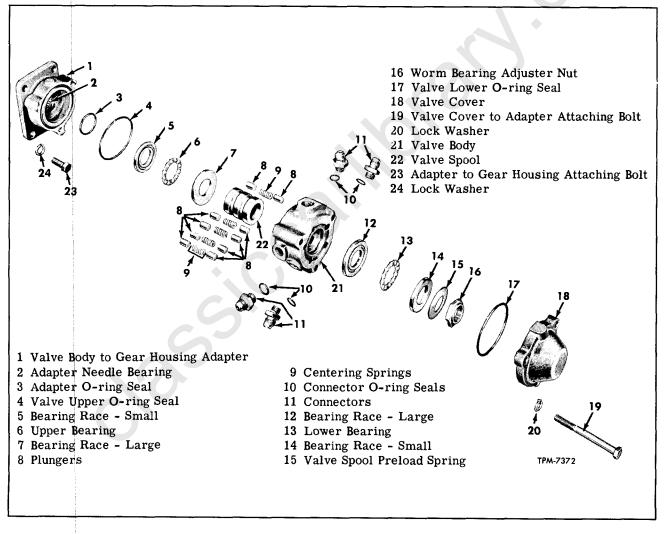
DV Steering Gear Hydraulic Valve Components
